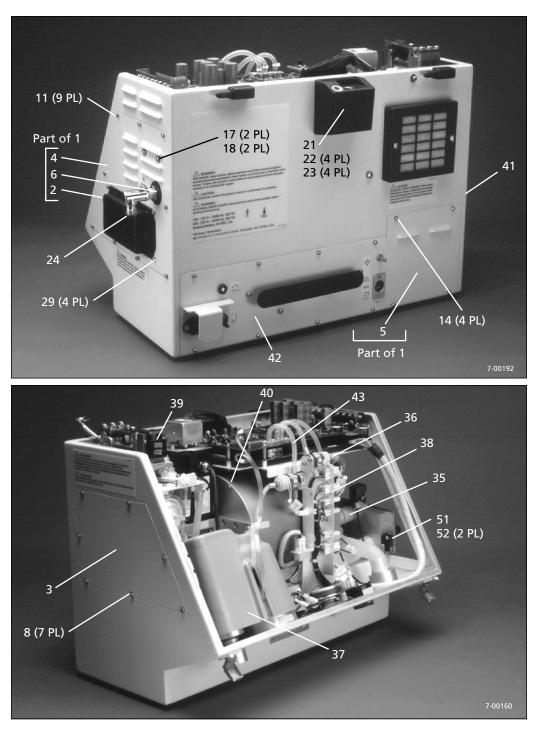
Ventilator head assembly (Sheet 1 of 2)
